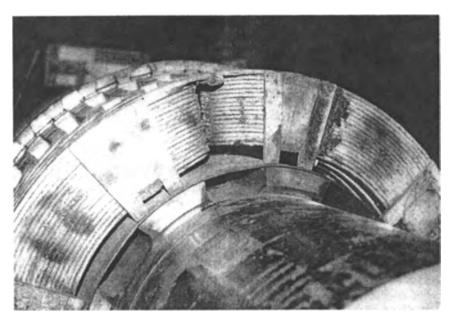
[R11] Front view of the end-winding of a 2-pole cylindrical rotor having the retaining ring removed. In this picture, the top connection between each pole winding can be seen.
